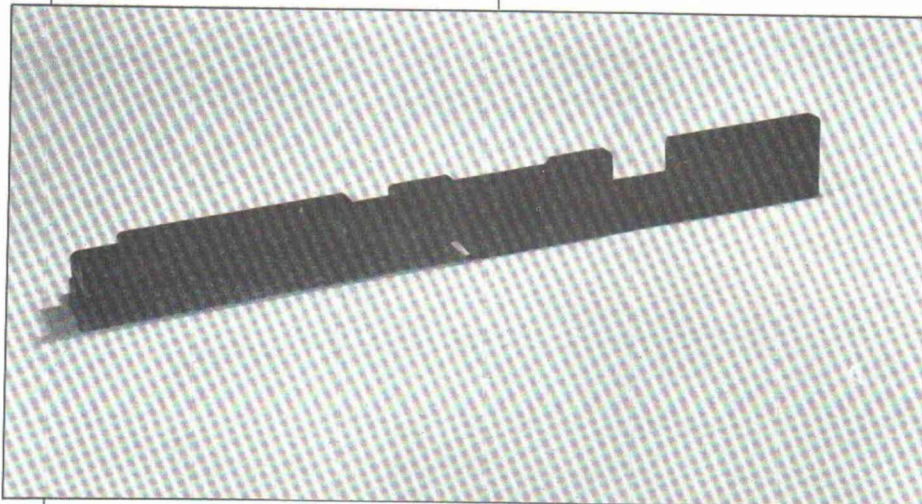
Remove black plastic strip above the parallel printer connector. Cut a slot in vertical face, wide enough for switch to slide freely.
